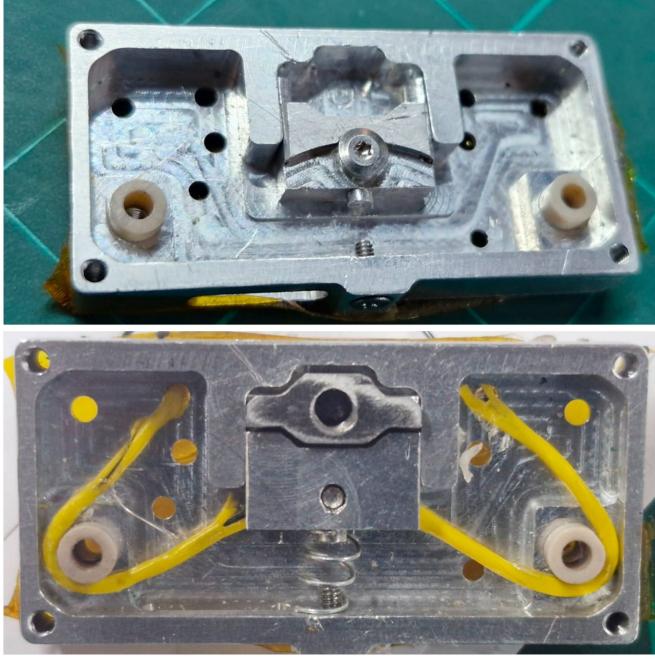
HDRM prototype. Top: Slider and locking nut interface prior to SMA wire installation. Bottom: Fully assembled prototype with SMA wire routed through PTFE sleeves and compression spring installed.
